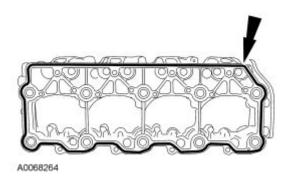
Identifying Press-In-Place Gasket Courtesy of FORD MOTOR CO.
